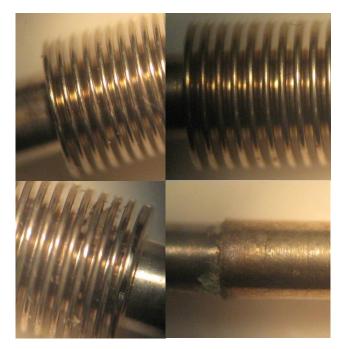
Magnified images of bellows seals after cleaning. Top left is human blood soil contaminated fixture. To the right is the semolina pudding soiled fixture. Bottom left is the cooked egg soil fixture. Bottom right is another view of the semolina fixture.
